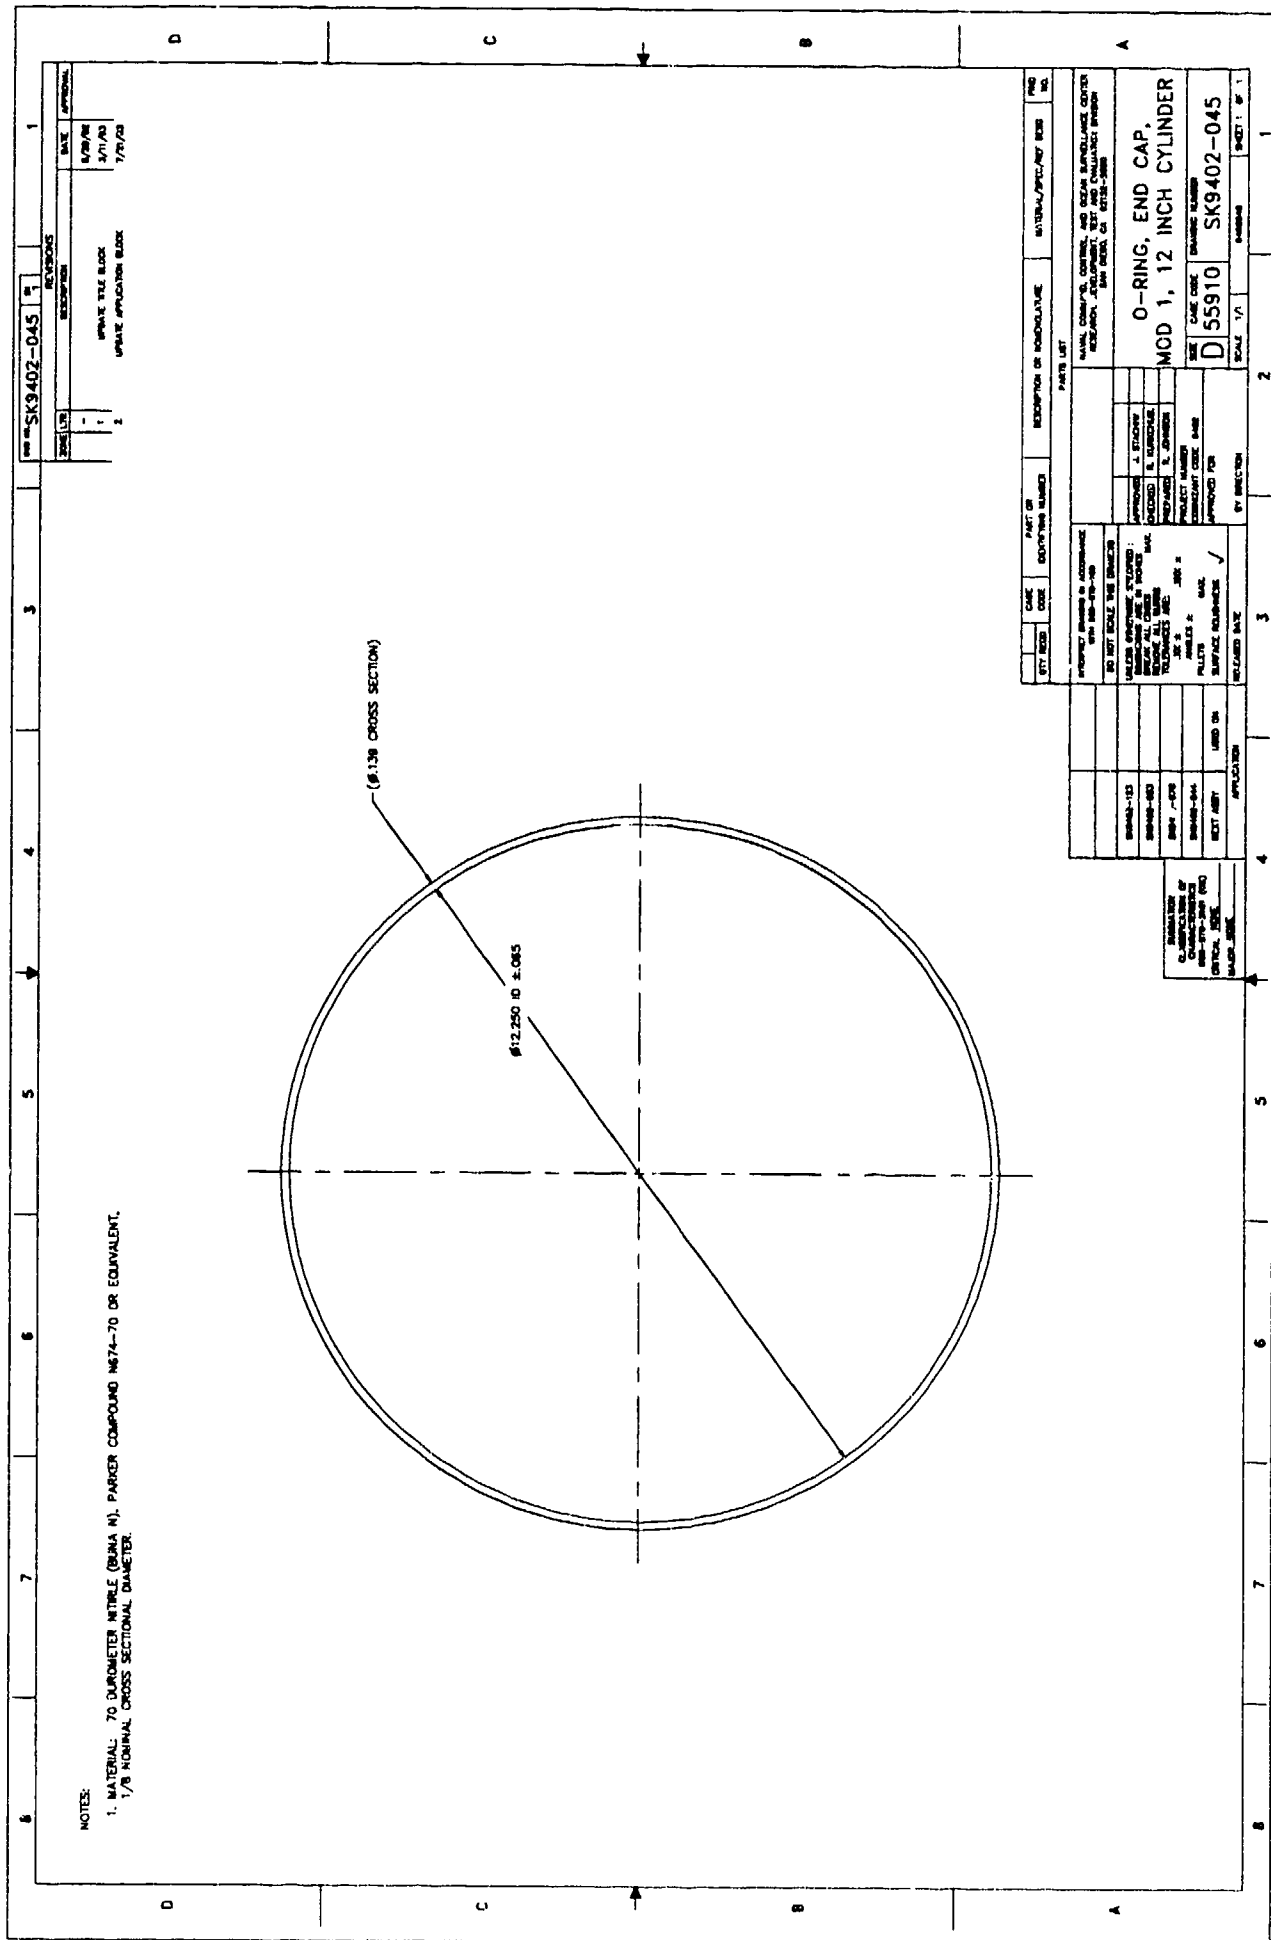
12-inch cylinder Mod 1 end-cap joint ring O-ring.
